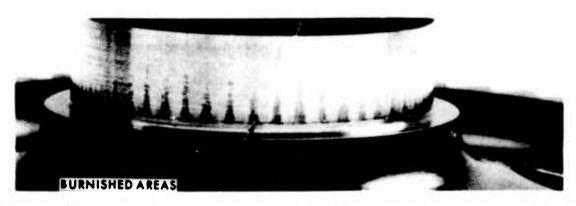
Burnished Roller - First-Row Pinion Dummy Gearbox.
